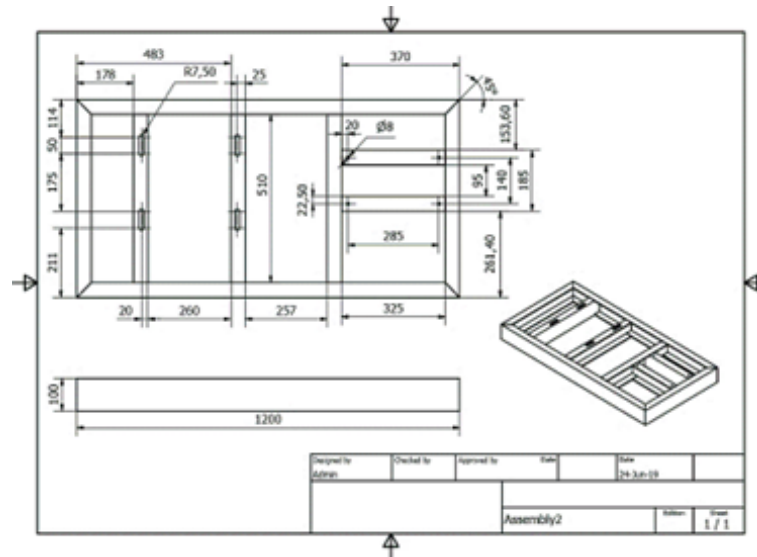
2D Dimension Size For Engine Mounting Frame
